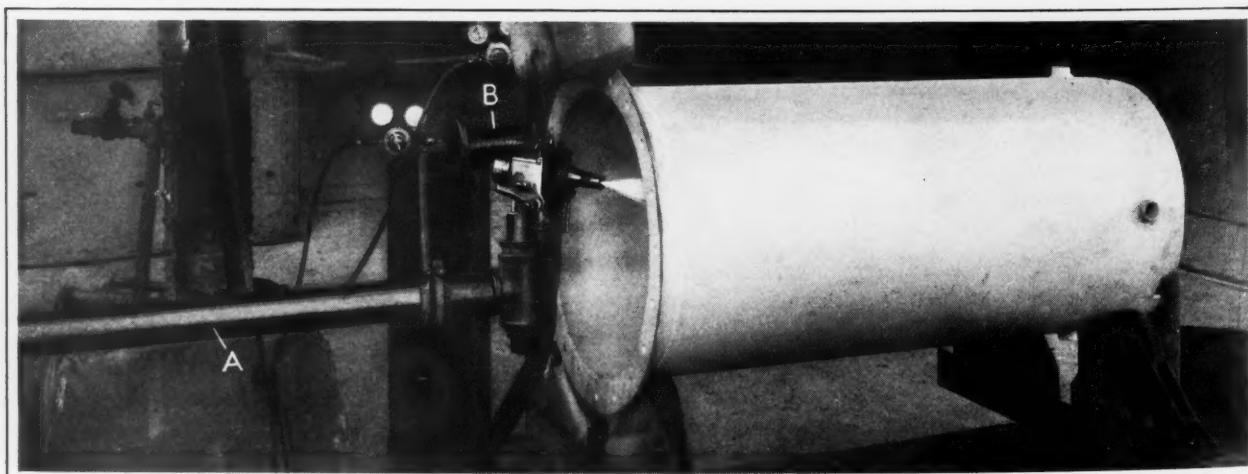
Simple Arrangement for Zinc-coating Interior of Steel Tank
